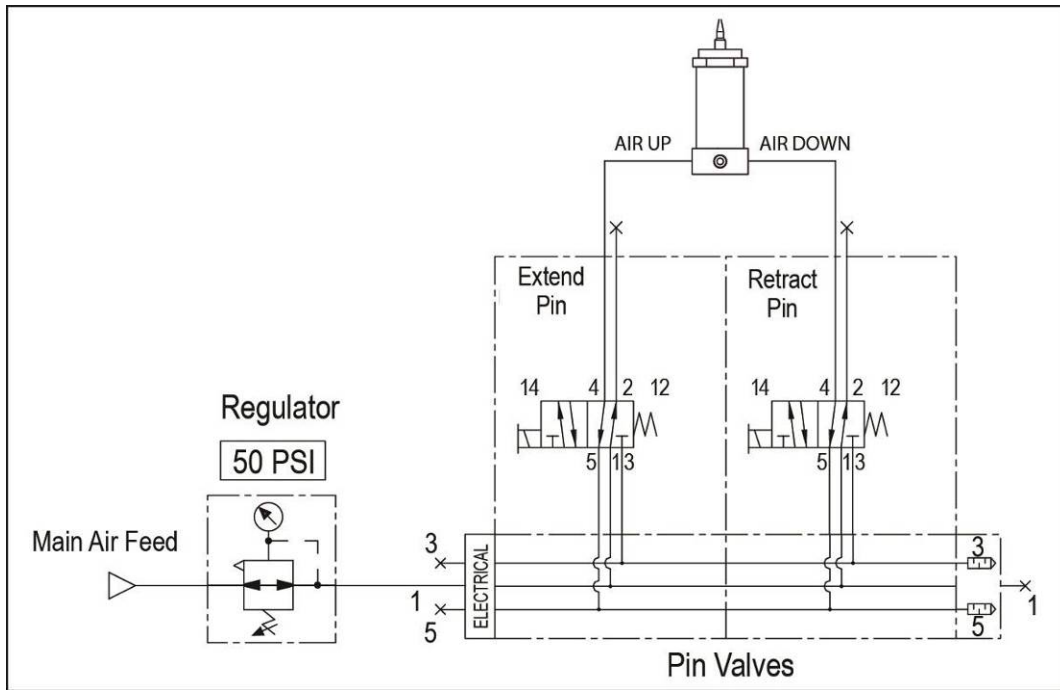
Pneumatic Connection Diagram for LVDT Weld Body Used in Welding Ring Projections or Clinching Applications (Not applicable to Clamp Mount Assembly)
